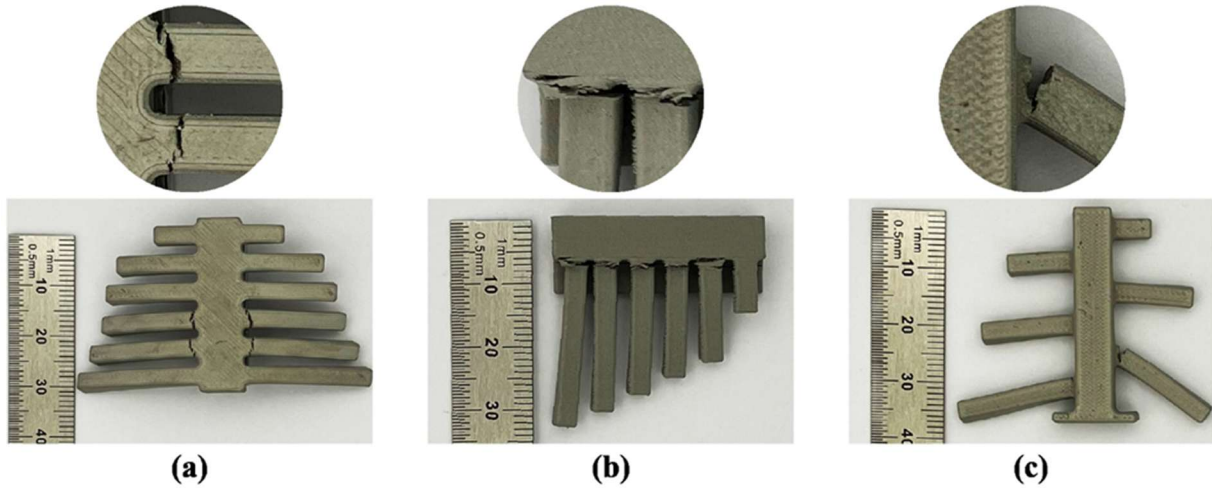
Respective sintered specimen with detail of fracture for (a) set-up 1, (b) set-up 2 and (c) set-up 3
